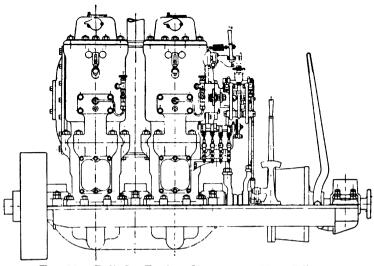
Bolinder Engine, direct reversible "E" type.
